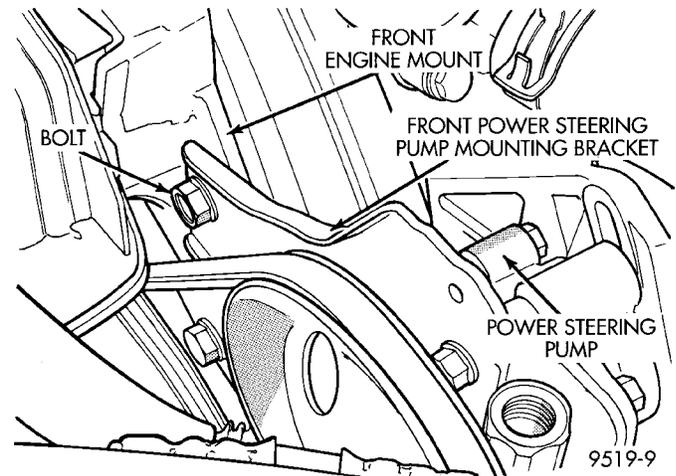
Power Steering Pump Front Mounting Bracket Bolt
